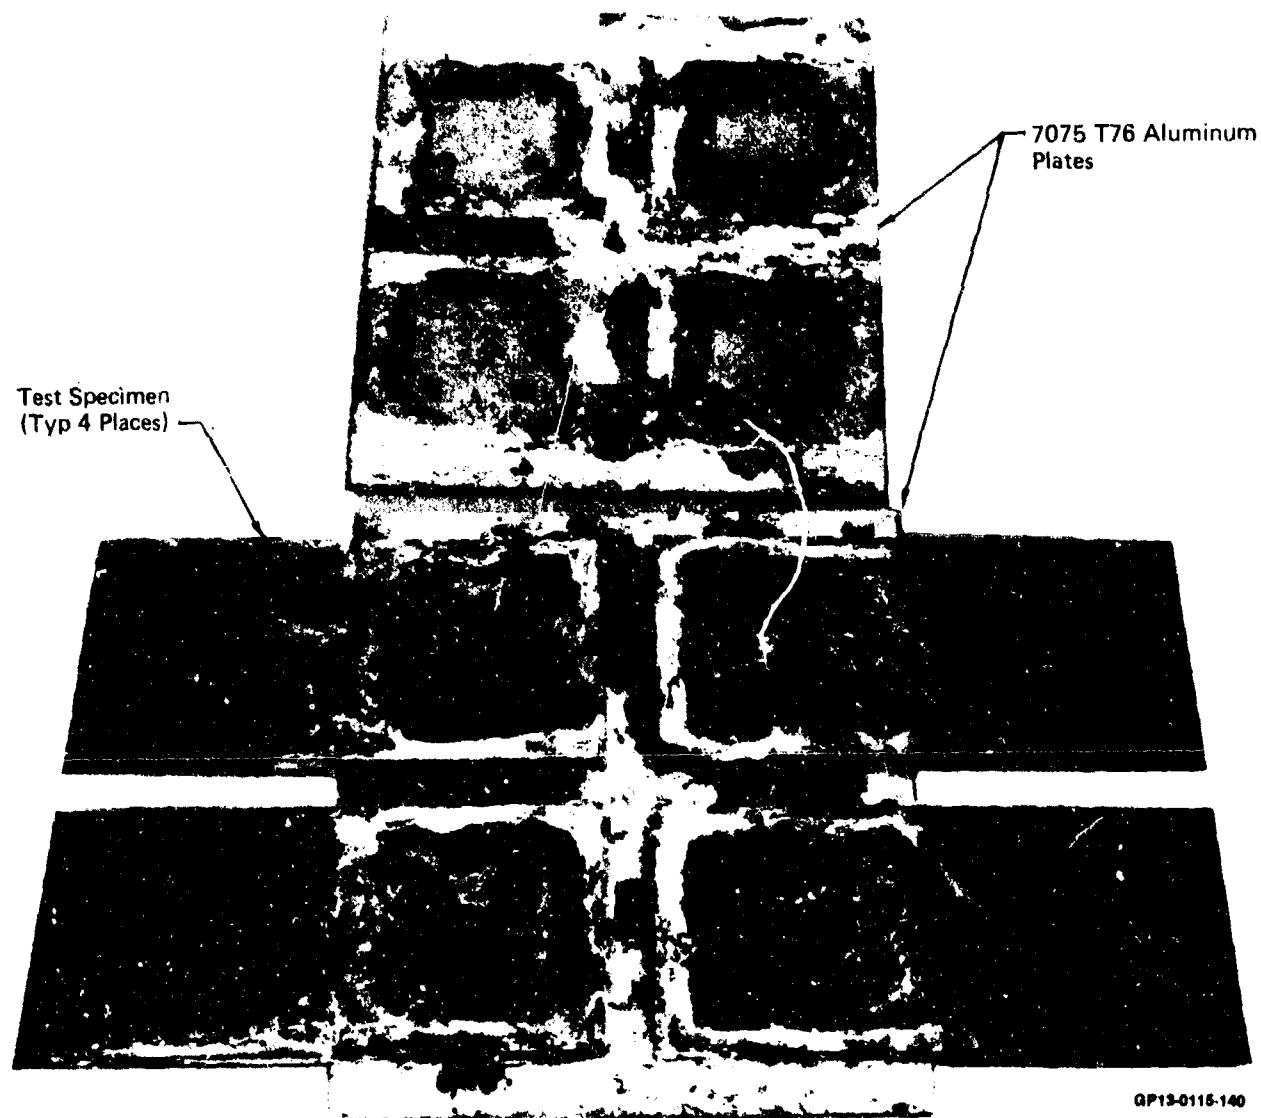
Exploded View of Salt Spray Exposure Test Setup After Exposure
